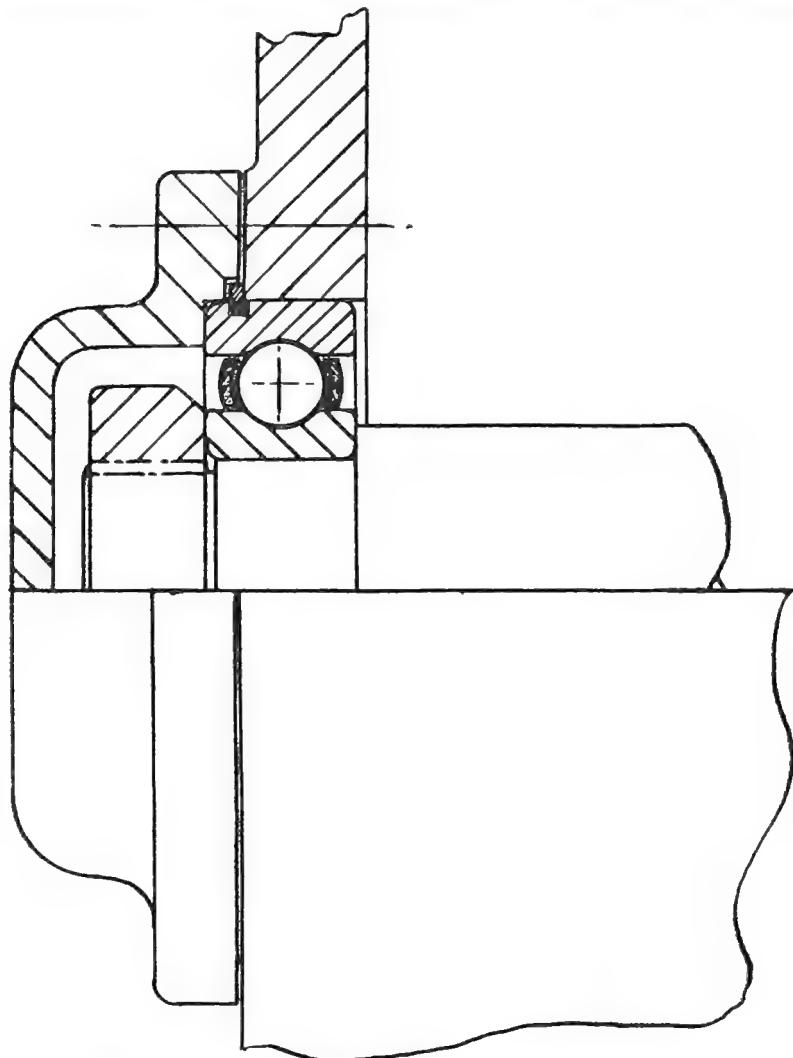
Method of Mounting for "Snap-Ring" Pattern Bearing.
